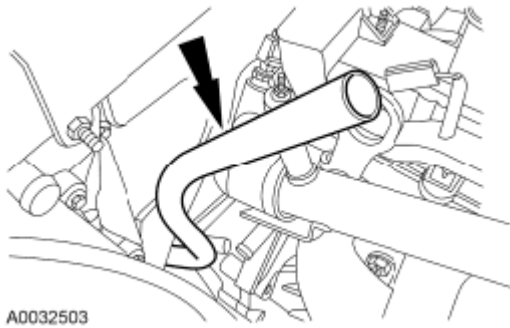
Locating Transmission Fluid Indicator And Tube Assembly
